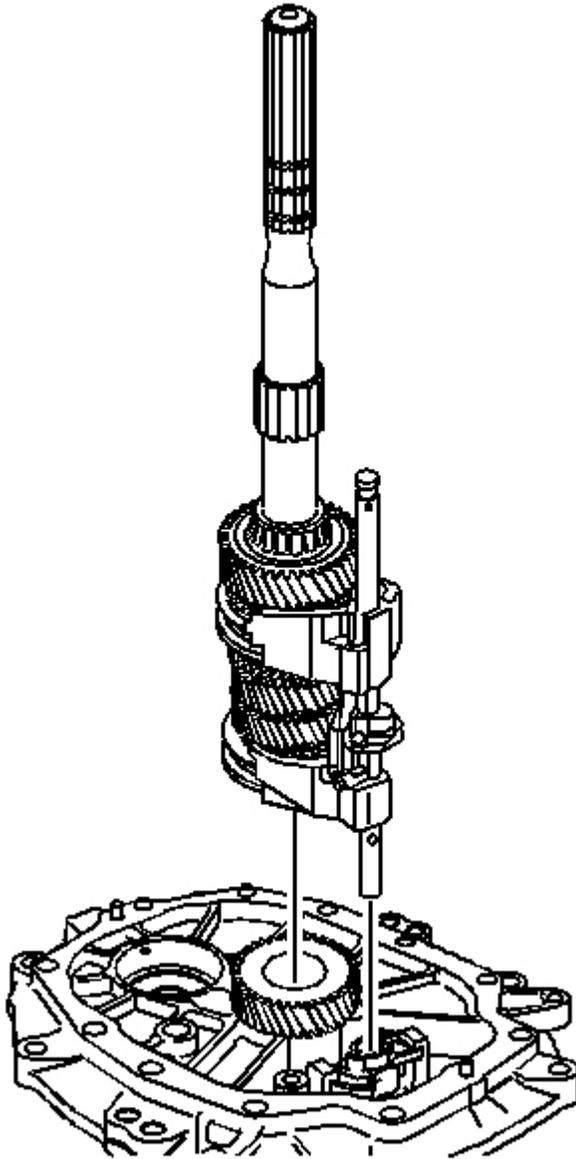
Installing/Removing Mainshaft Assembly & Shift Shaft Components
